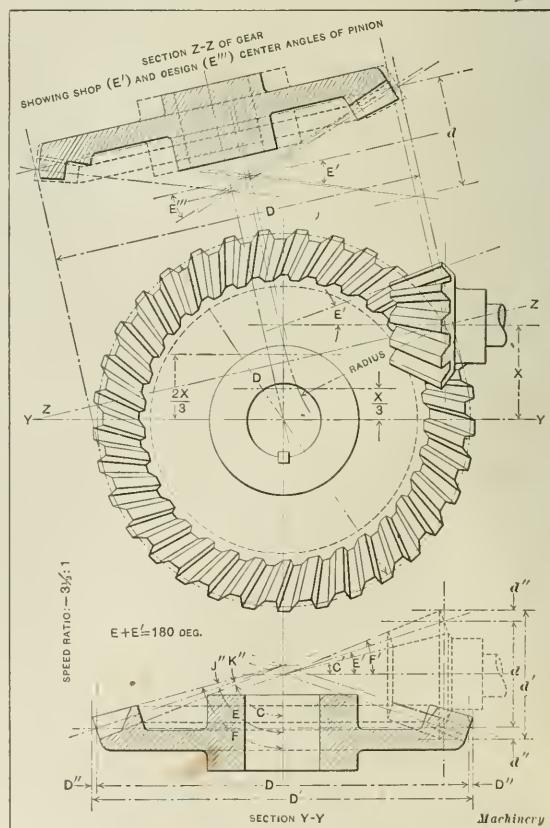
Diagram showing Principles involved in Lay-out of Type B Skew Bevel Gears, in which both Gear and Pinion have Skew Teeth
